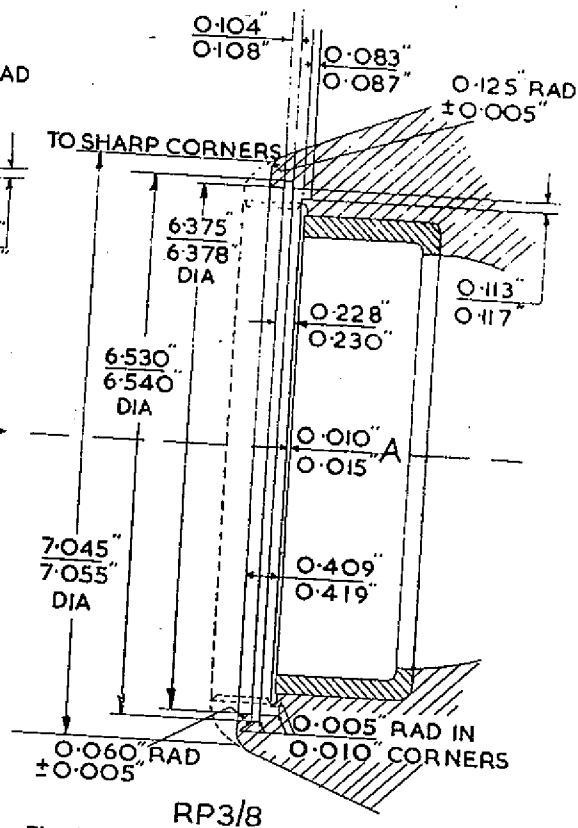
Dimensions for machining hub with outer track of bearing in position
